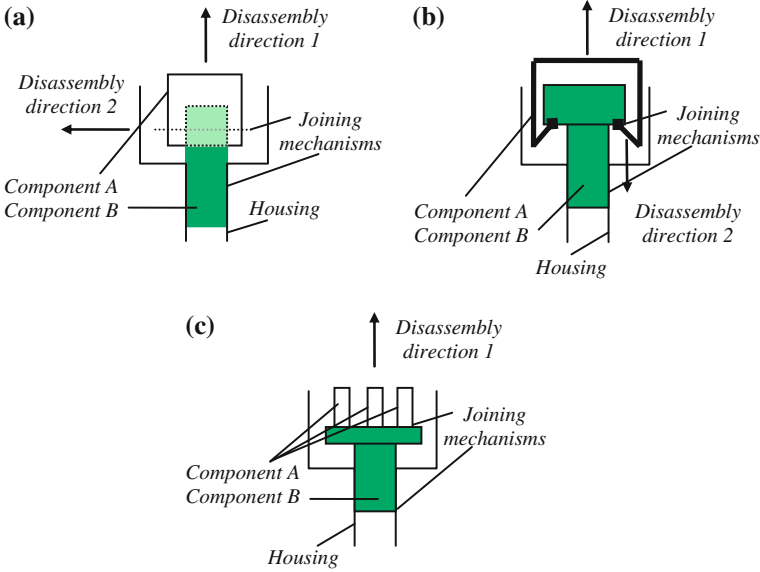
Examples of constraints during disassembly a A geometrical constraint. b A geometrical constraint. c Technical constraint
